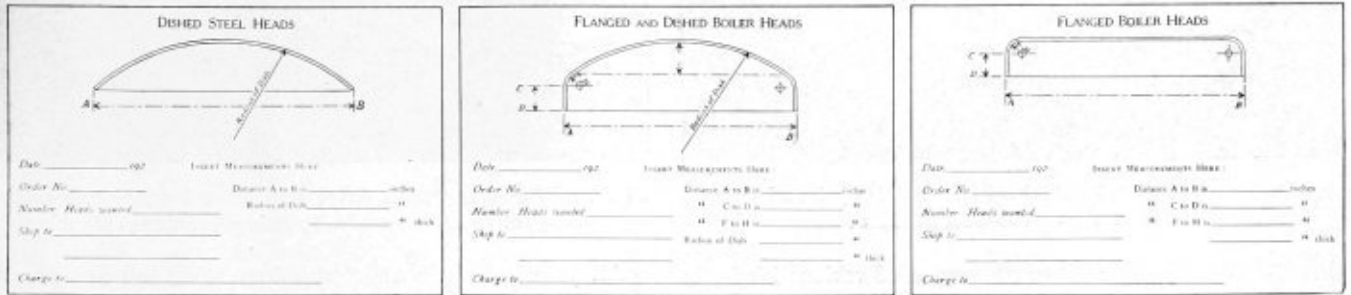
Typical Blanks Used in Ordering Flanged and Dished Heads
